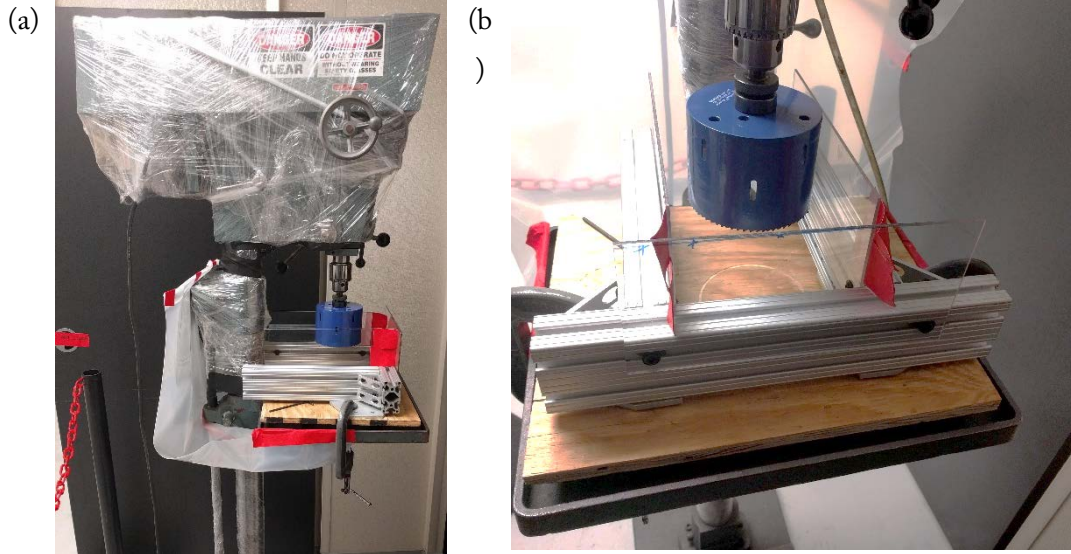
A drill press (a) and hole saw (b) were used to cut each piece of tissue down to a 110 mm diameter cylinder.
